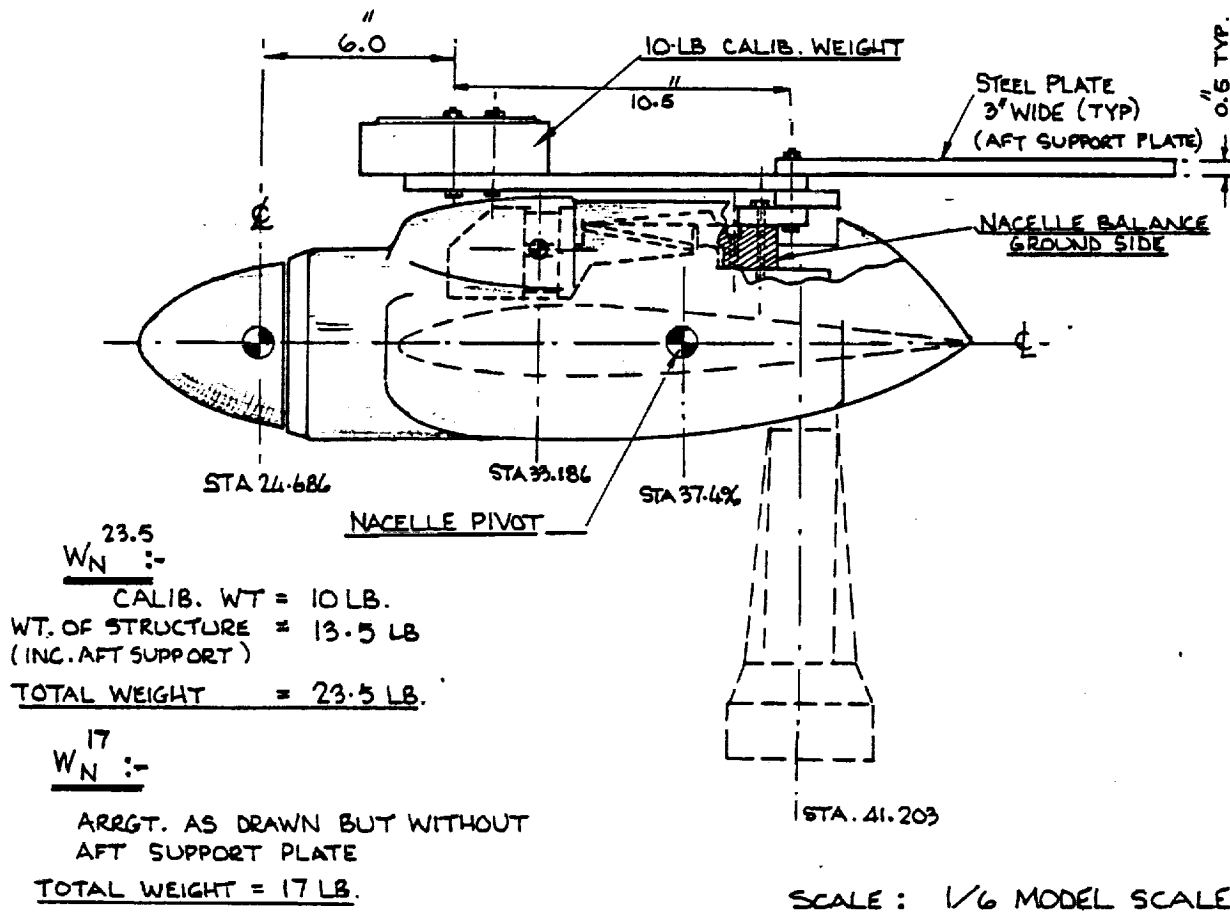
GENERAL ARRANGEMENT AND INSTALLATION ON SRH TEST STAND
